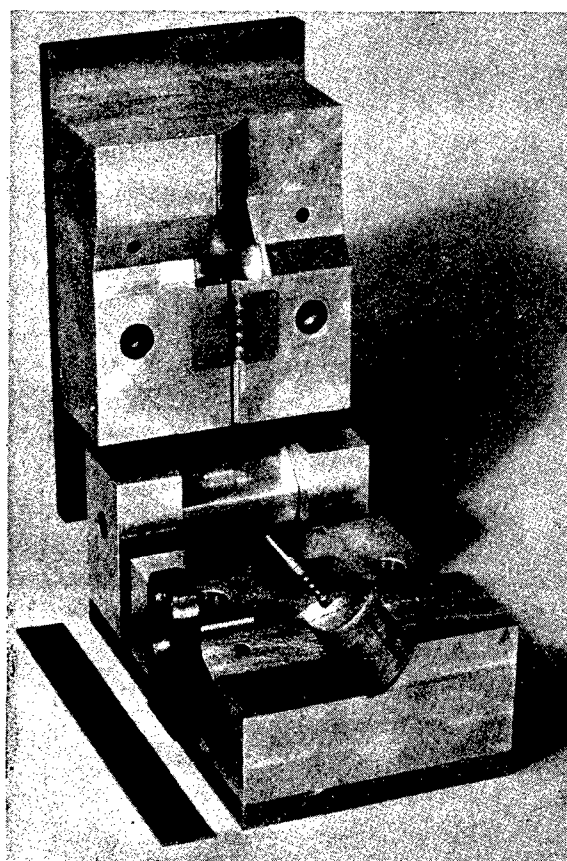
and 84 are examples of component parts required to assemble the ceramic core used to cast the hollow blade. These figures show the core prior to Cavitron machining the core slots.
